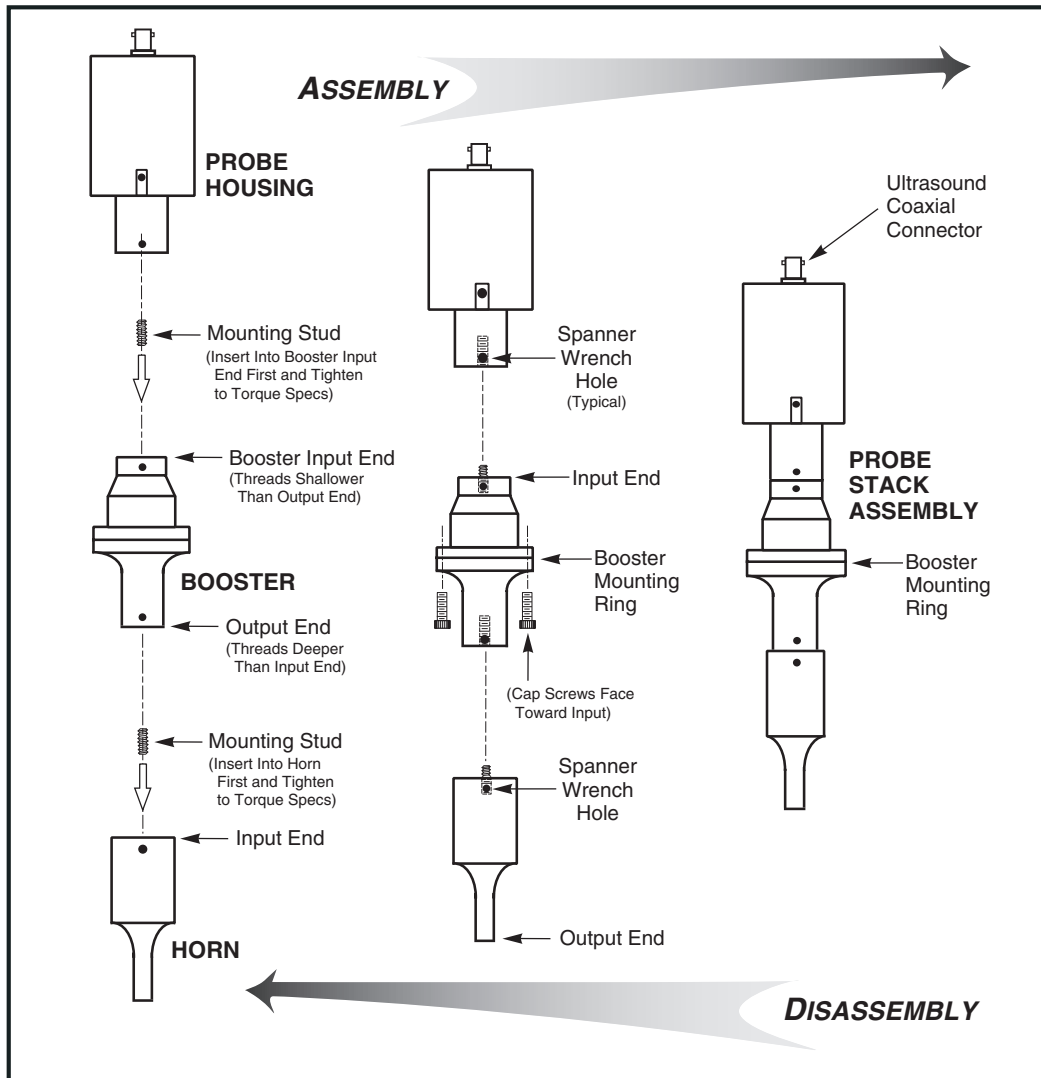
Probe Stack with Booster Assembly and Disassembly
